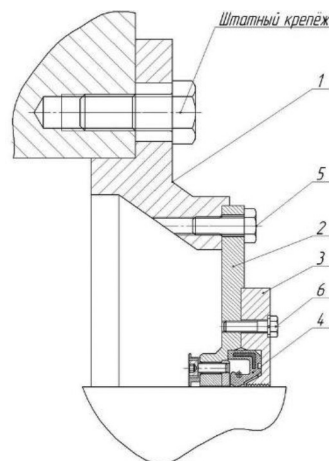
The seal of the bearing assembly: 1 – the big body, 2 – MFS, 3 – front cover (“boot”), 4 – cuff 300 × 340, 5 – bolt M10, 6 – bolt M6
